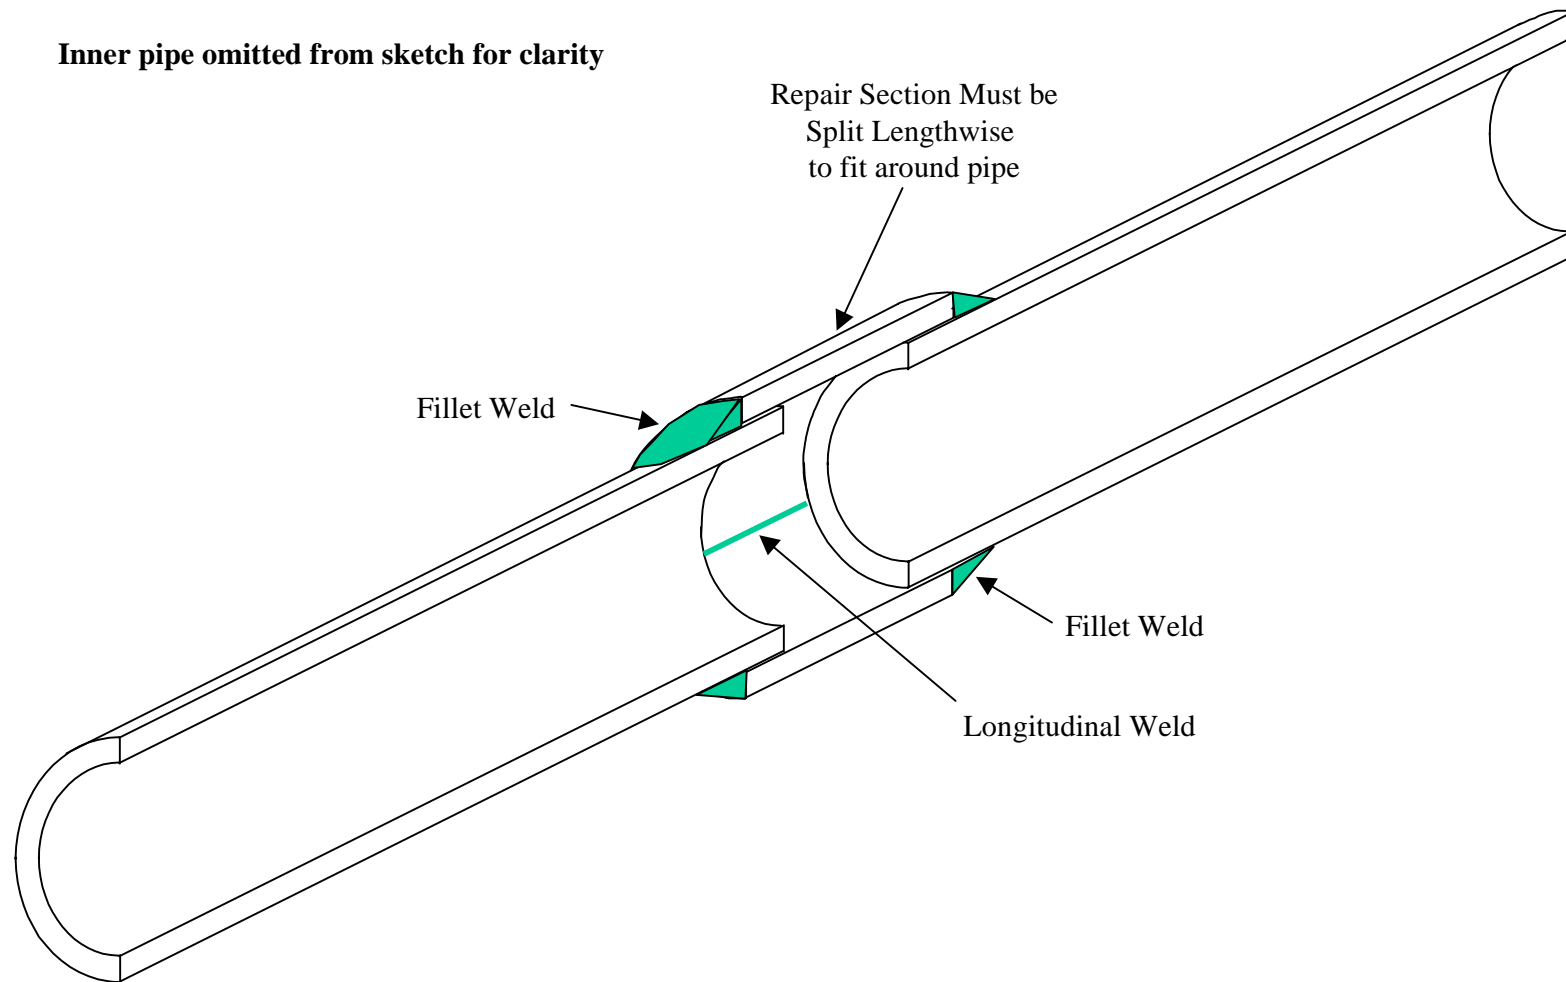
Fillet Weld Repair of Outer Pipe: Pipe-in-Pipe Alternative
